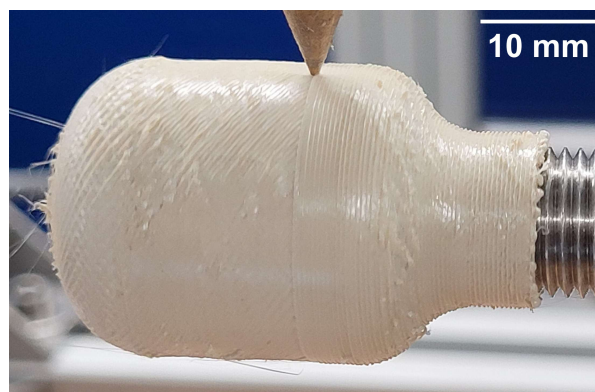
Specimen R-1-2 during printing, with a 90 degree layer being printed on top of the 55 layer.
